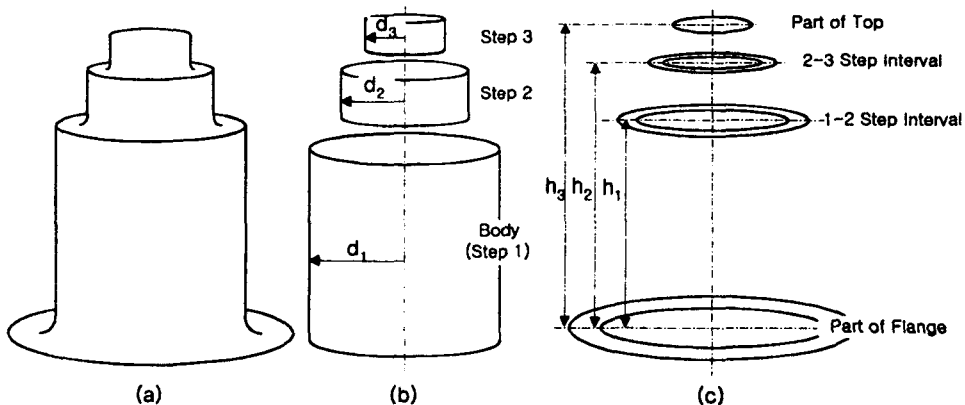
(a) Shape of deep drawing part, (b) Step design feature, (c) Step Interval design feature
